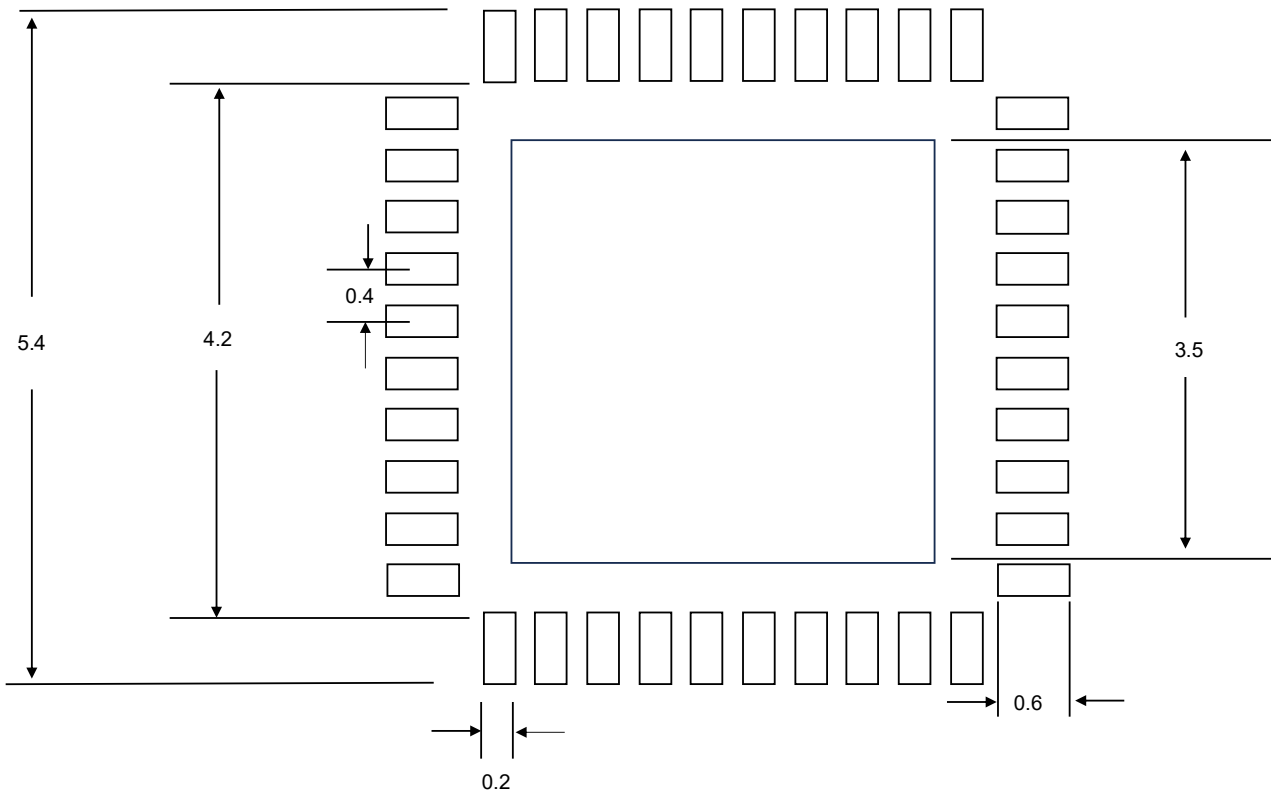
MS2008 Packaging Land Pattern Drawing (5X5, 40LGA)
